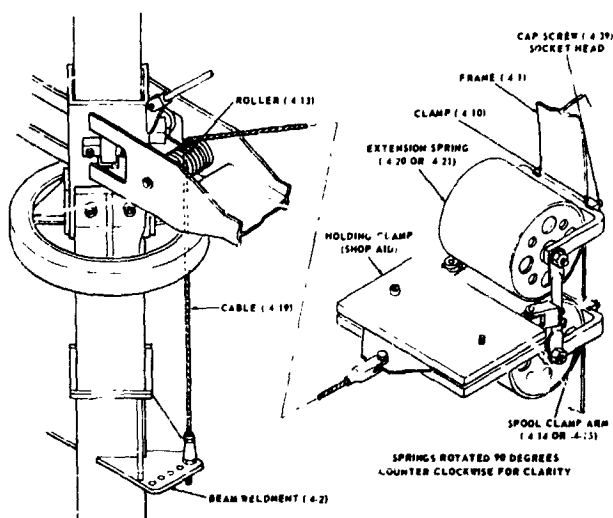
INSTALLATION OF EXTENSION SPRINGS
